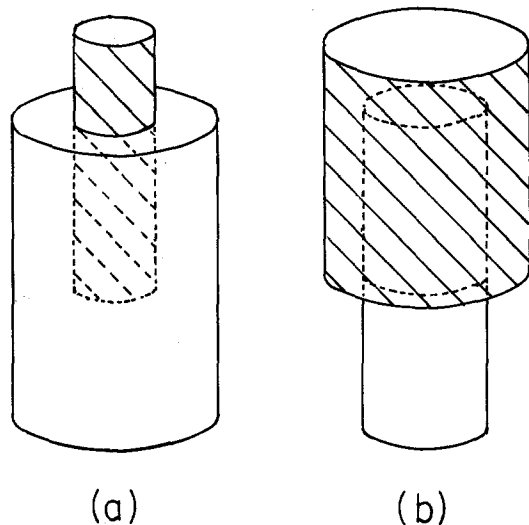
Sketch of model joints showing (a) rod joint and (b) sleeve joint. The rigid parts are shown shaded, the elastic parts not shaded.
